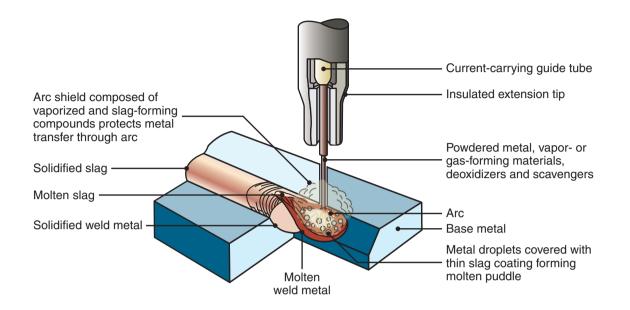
Schematic illustration of the flux-cored arc-welding process. This operation is similar to gas metal-arc welding, shown in Fig. 30.11.
